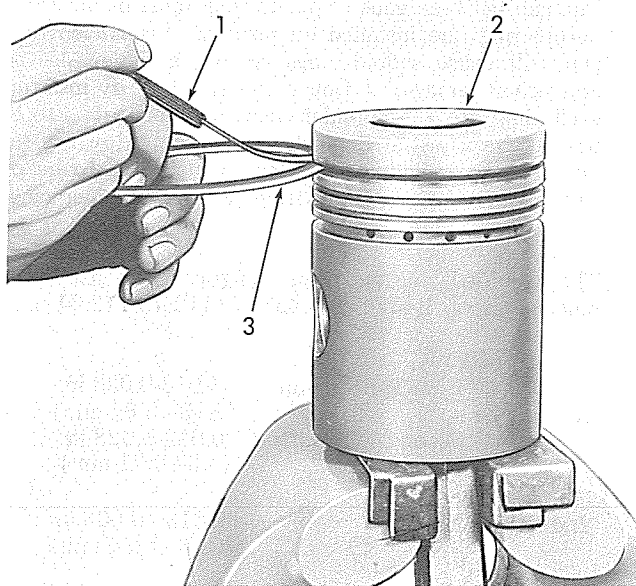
Checking Piston Ring-To-Groove Clearance
